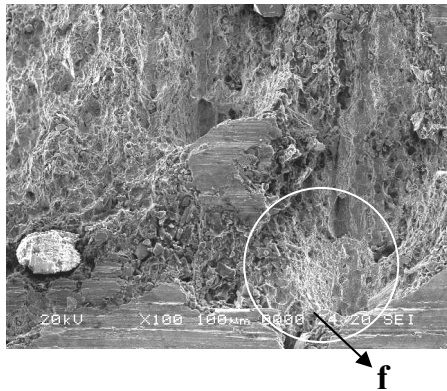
Fracture Morphology of PWHT specimen in the HAZ region
